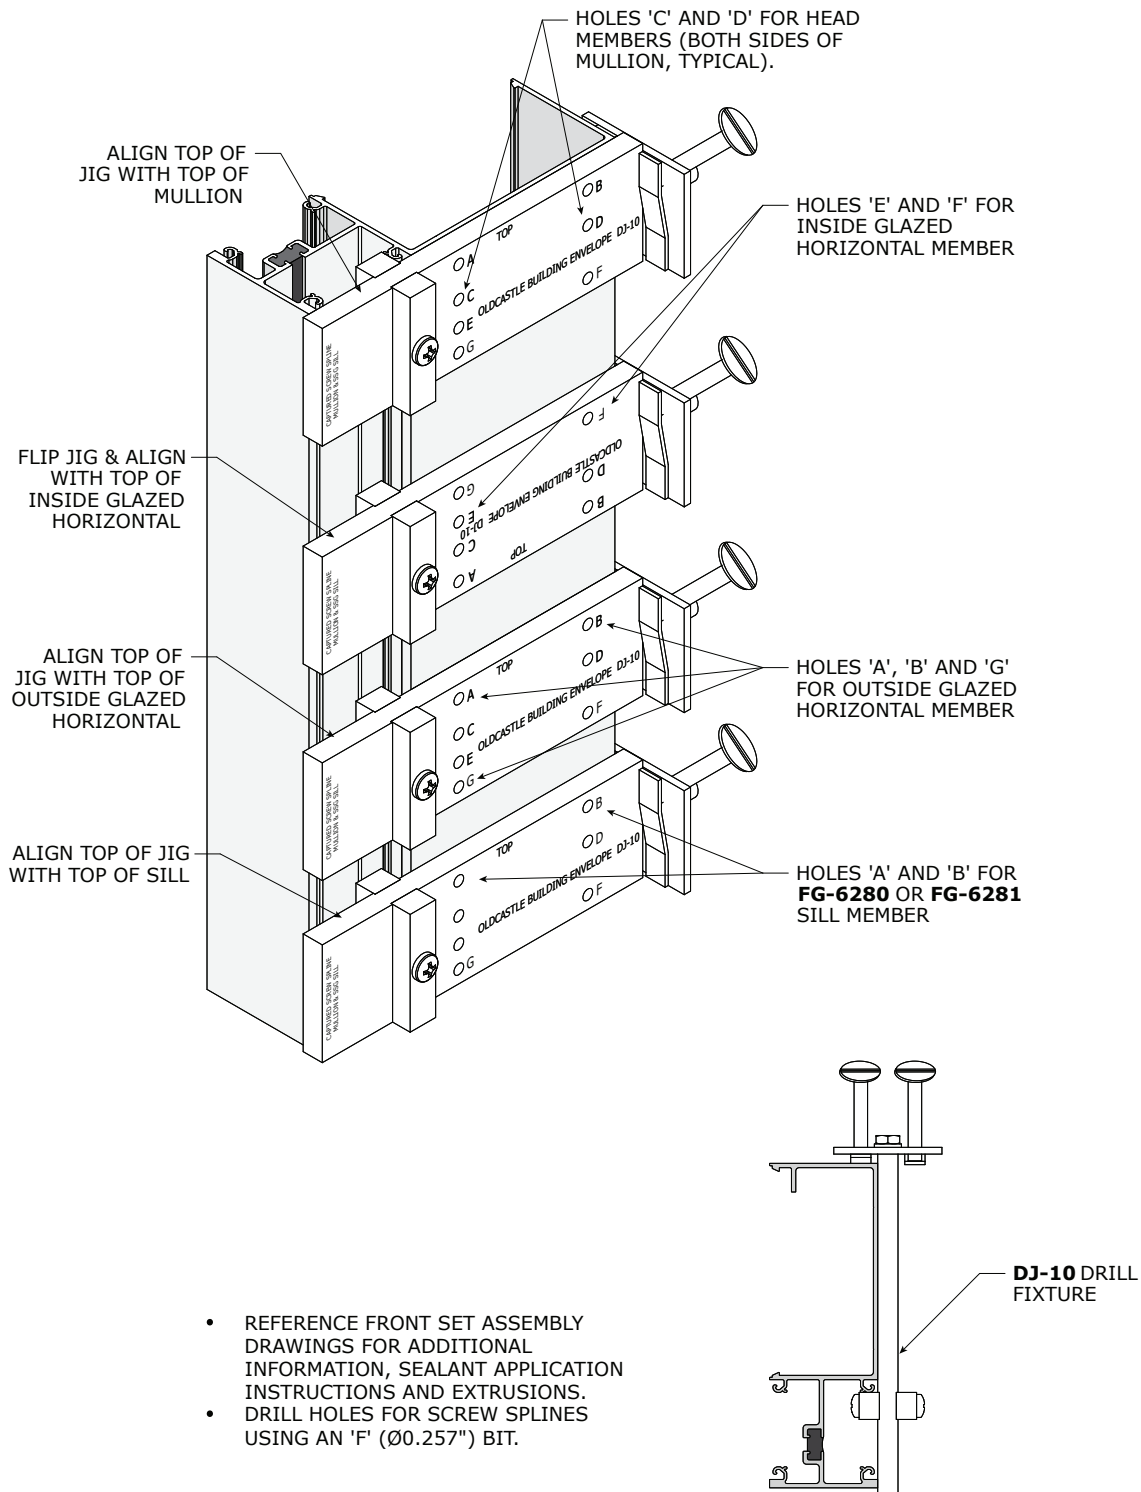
DJ-10 Drill Fixture for Front Set, Screw Spline System
